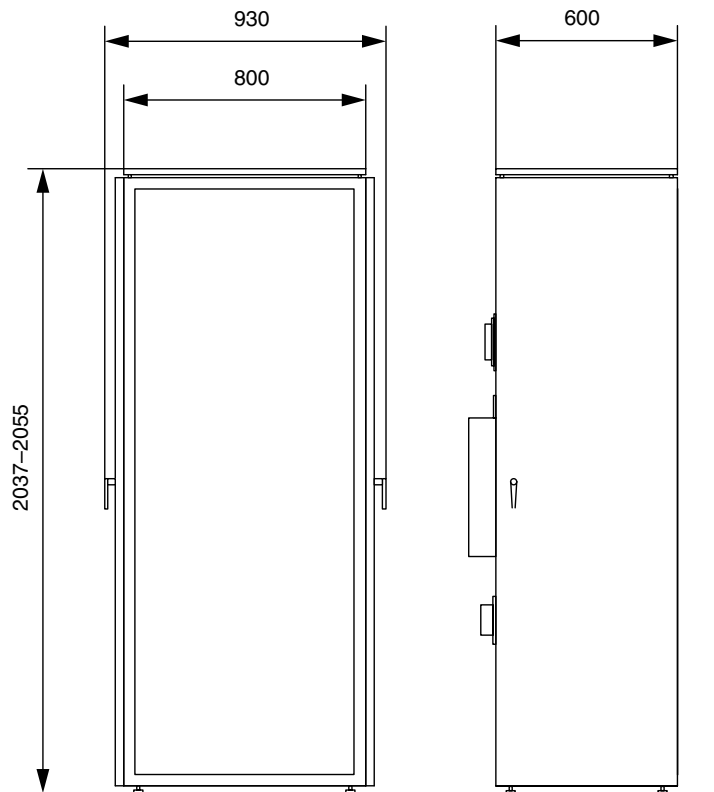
Stimulus cabinet dimensions in millimeters.
